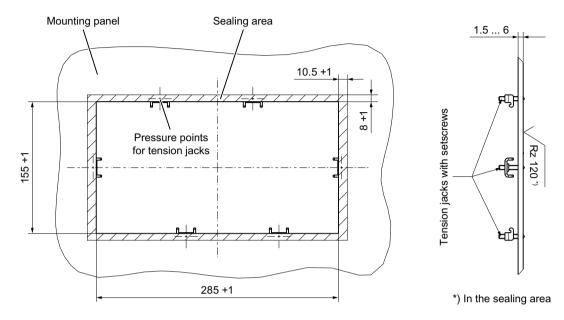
Dimension drawing for machine control panel MCP 310 PN
